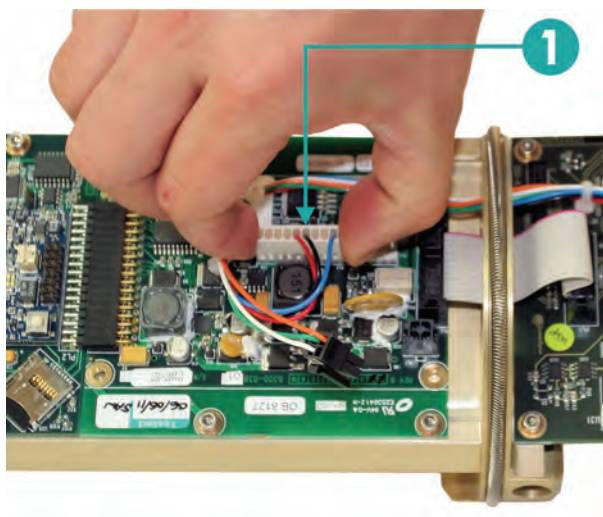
Disconnecting PL1 Connection from the Interface PCB Assembly
